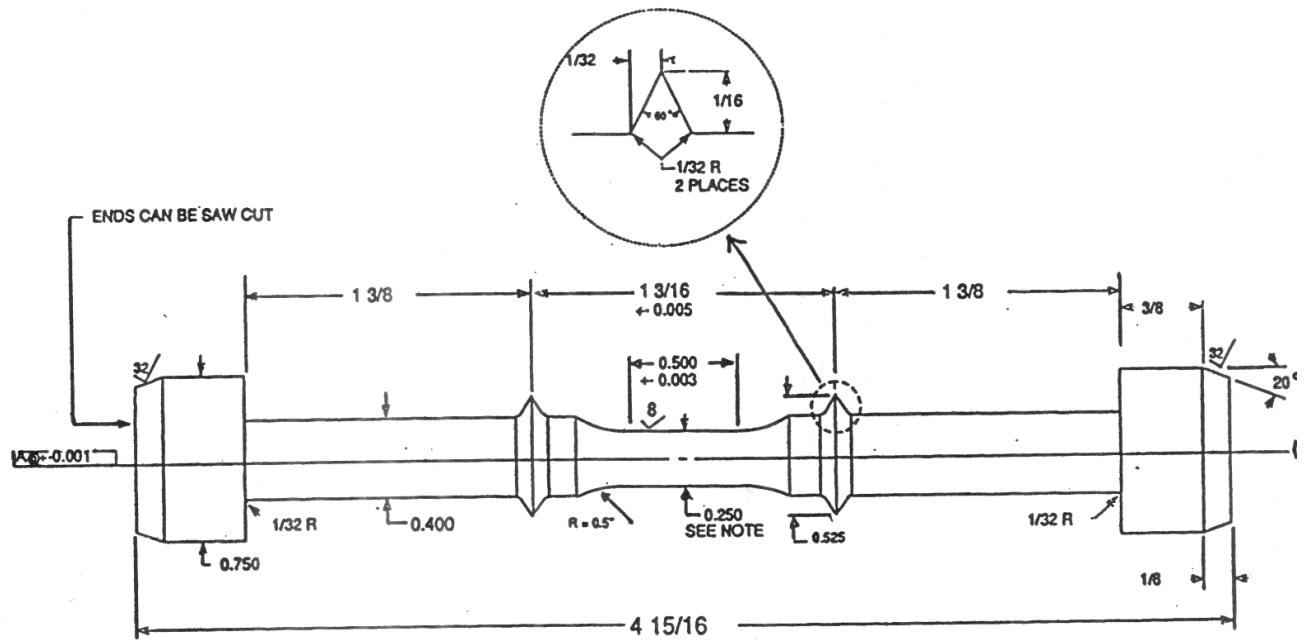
SG Low cycle fatigue specimen geometry.^[42]
